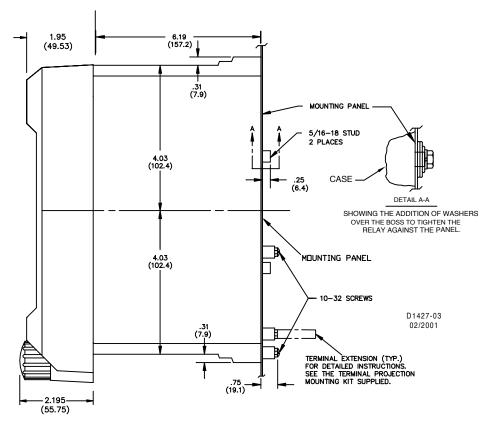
S1 Case, Single-Ended, Projection Mounting, Outline Dimensions, Side View
